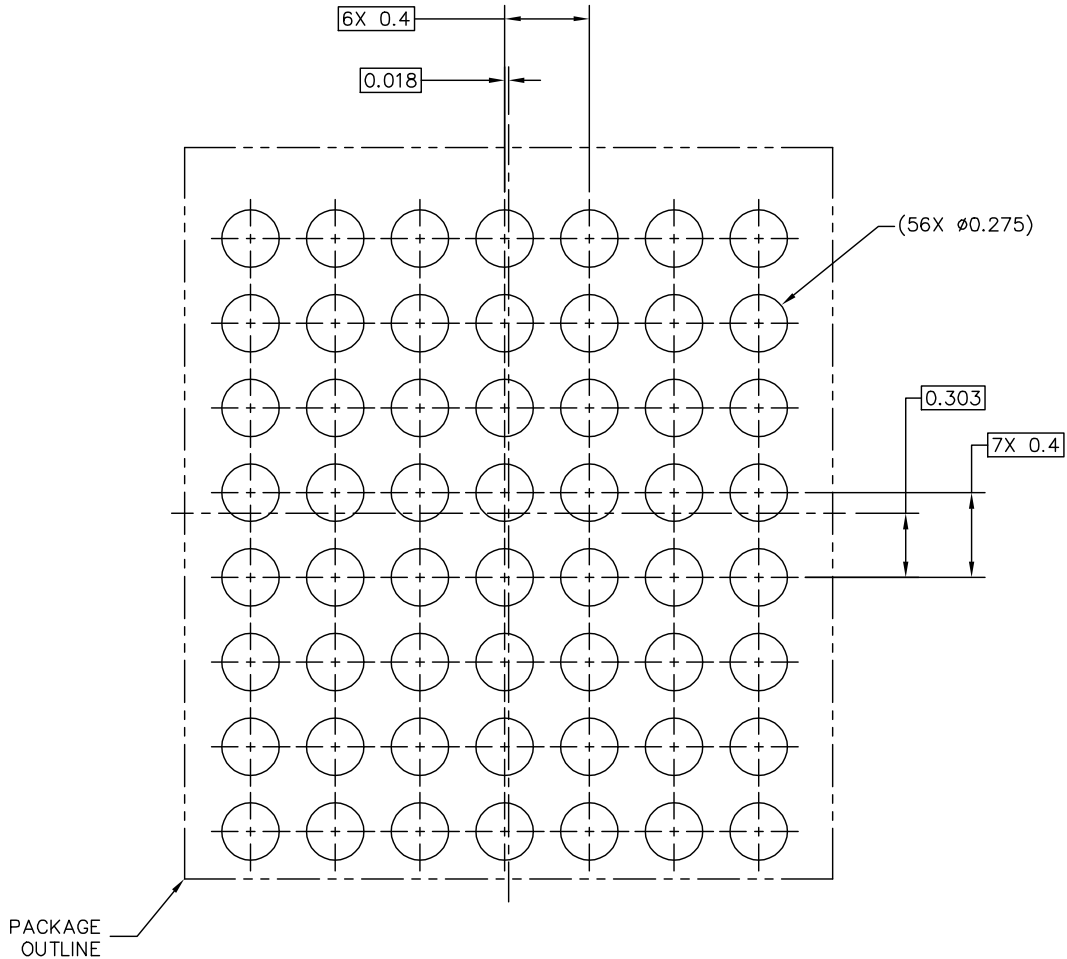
Reflow soldering footprint part2 for WLCSP56 (SOT1914-2)
